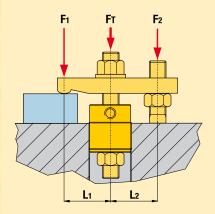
Hollow plunger cylinder used in hydraulic clamping set-up.
